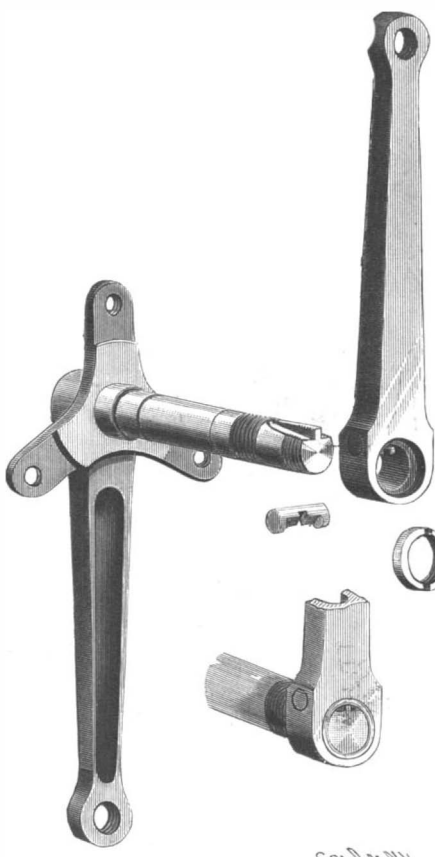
CRANK DETAILS SHOWING METHOD OF ATTACHMENT TO AXLE.
